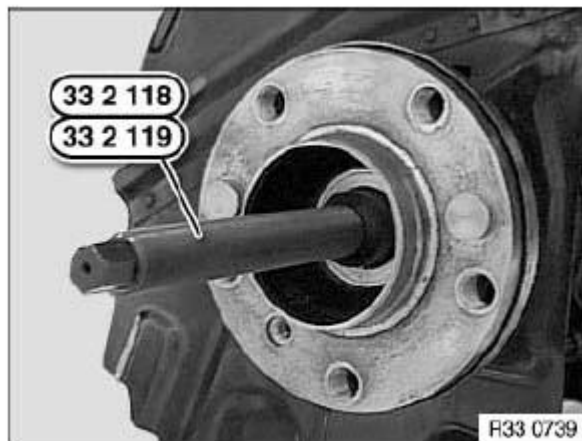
Identifying Special Tool (33 2 118 And 33 2 119) Onto Output Shaft
